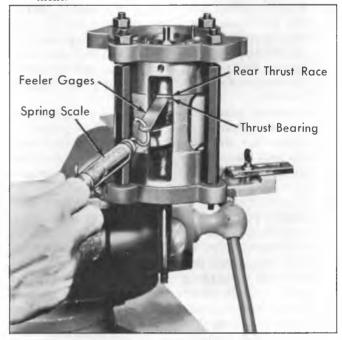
Checking Clearance Between Rear Thrust Bearing and Outer Thrust Race
